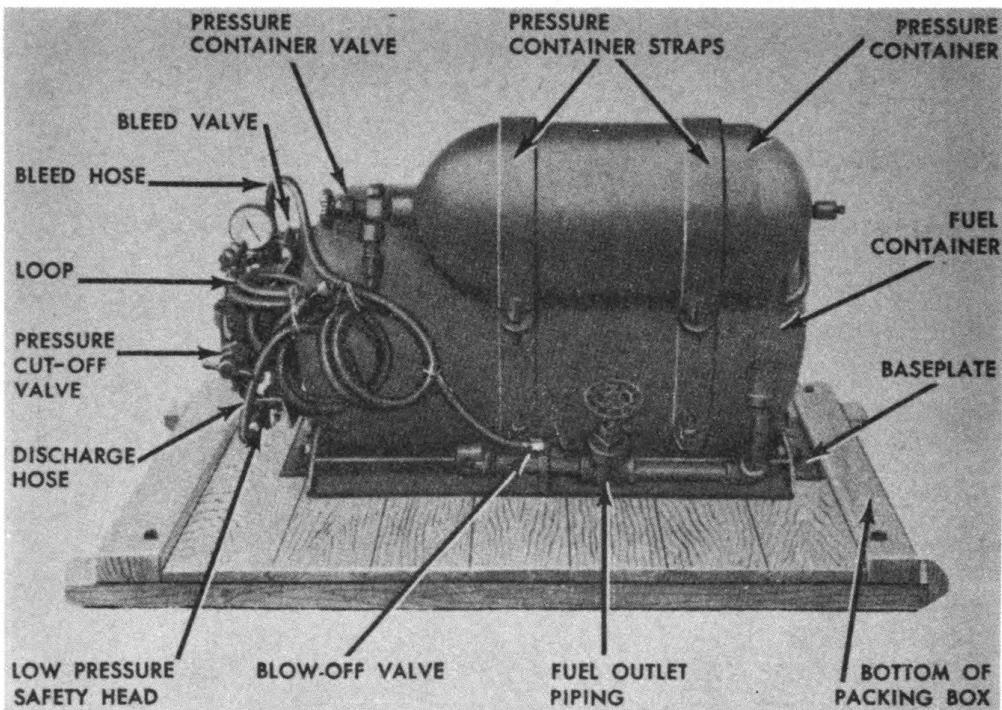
Sponson fuel group ready for disassembly prior to installation.
